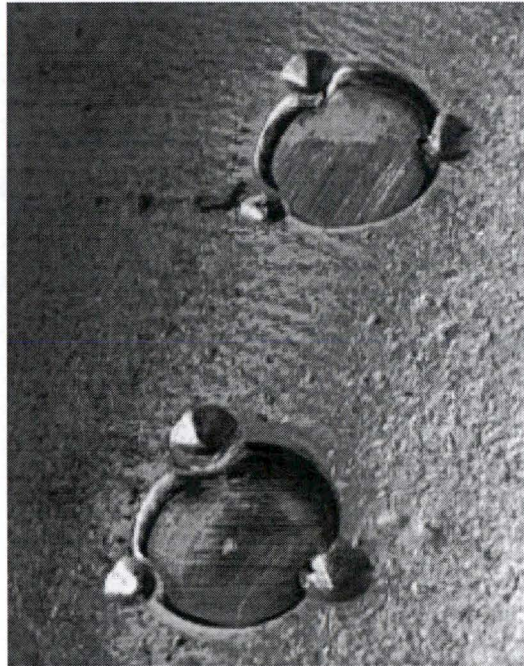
Proper Staking - Pin surface is slightly below disk surface and disk material is staked over the top of the pins
